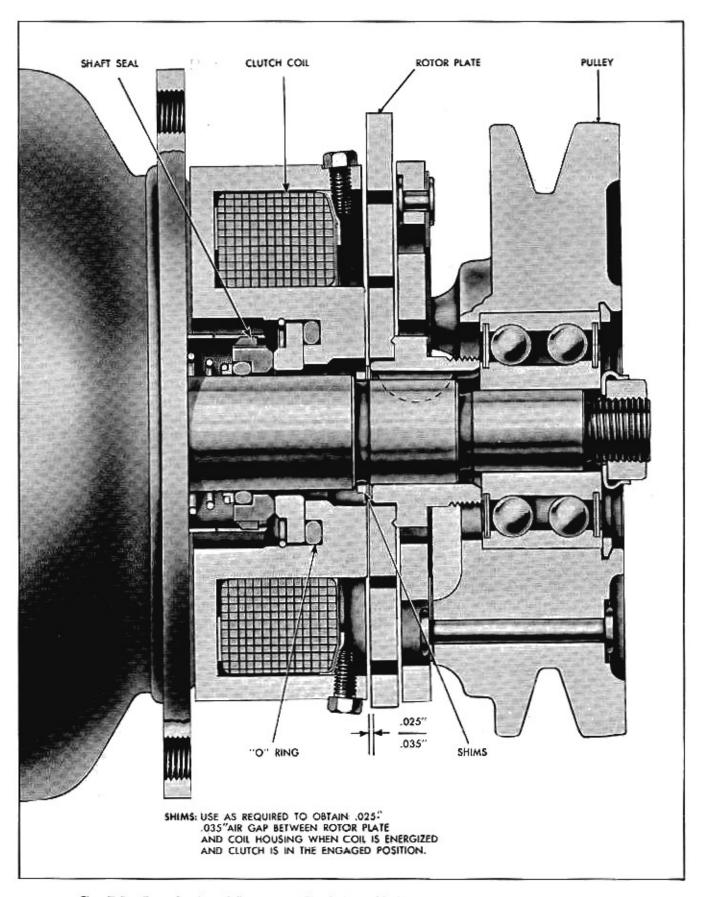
Cross Section of Compressor Clutch Assembly (Pontiac and Tempest V-8 Pulley Shown)
